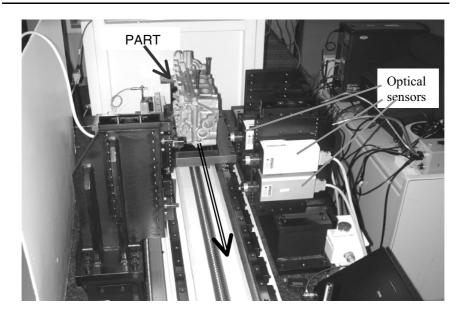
A reconfigurable inspection machine (ERC at UM)
